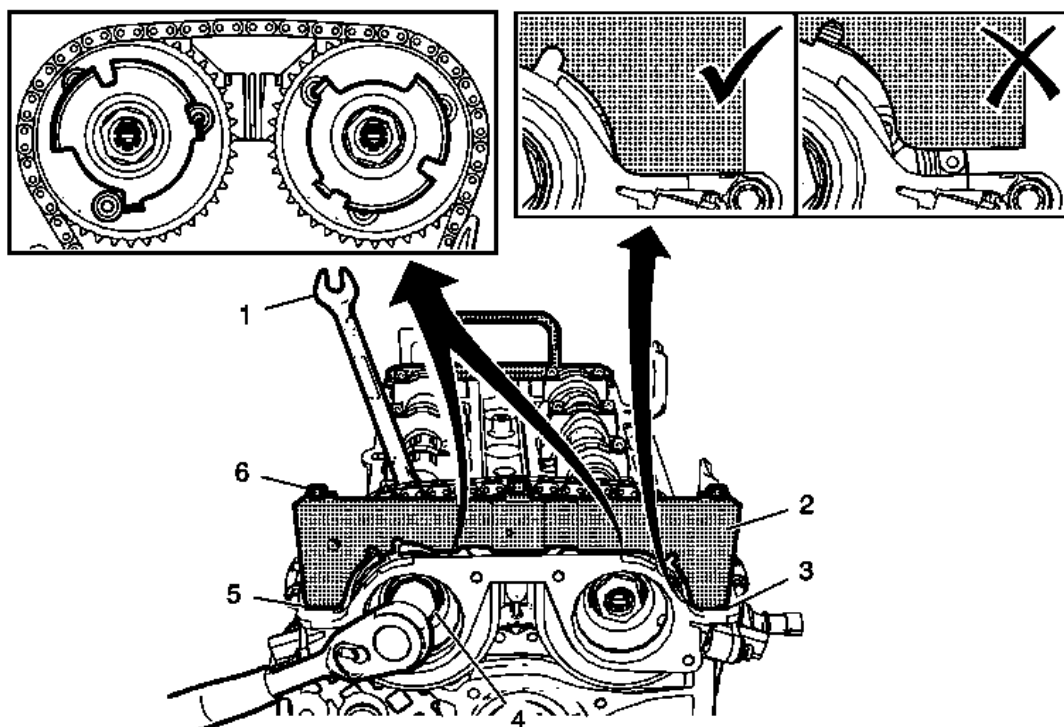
Intake Camshaft Sprocket Bolt And Cylinder Head
